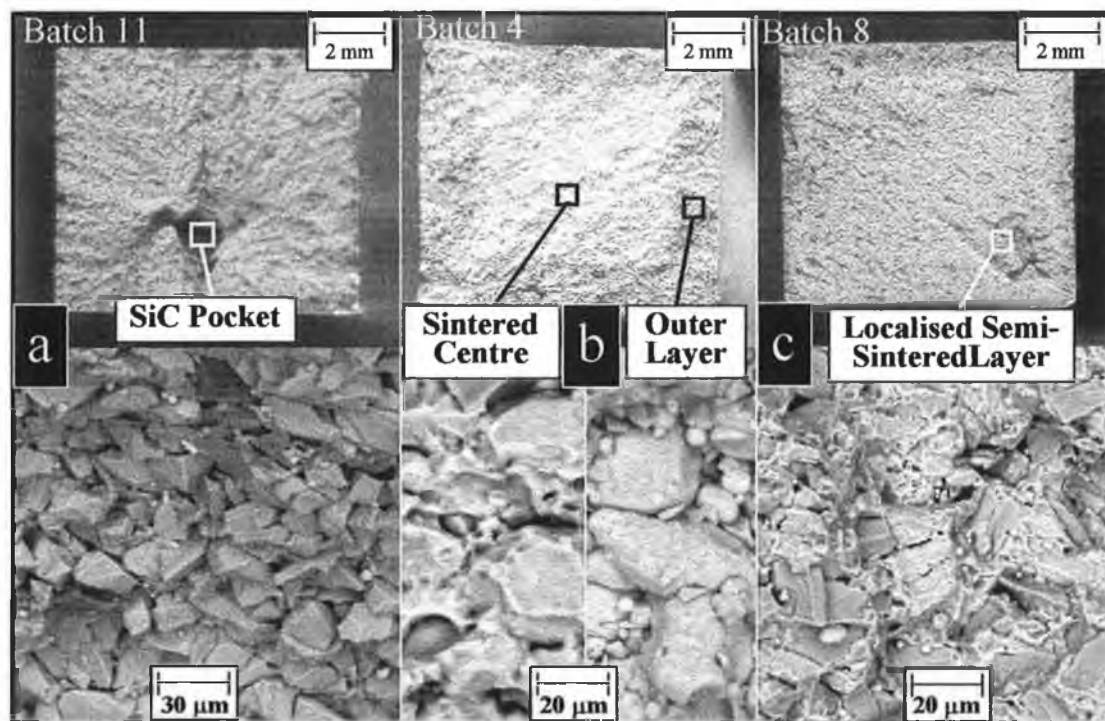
Fracture surface defects, test matrix no. 4.
